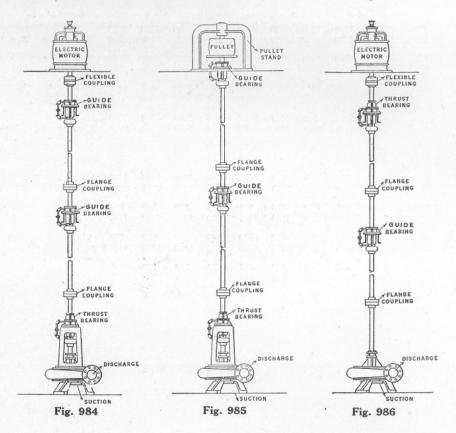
direct connected to motor, thrust bearing to support weight of shafting, etc. mounted directly on top of pump, flanged suction inlet.
